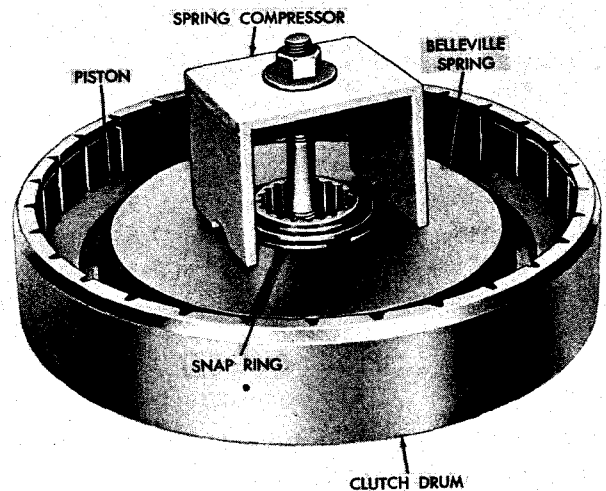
Compressing low-splitter, or high-range clutch spring
